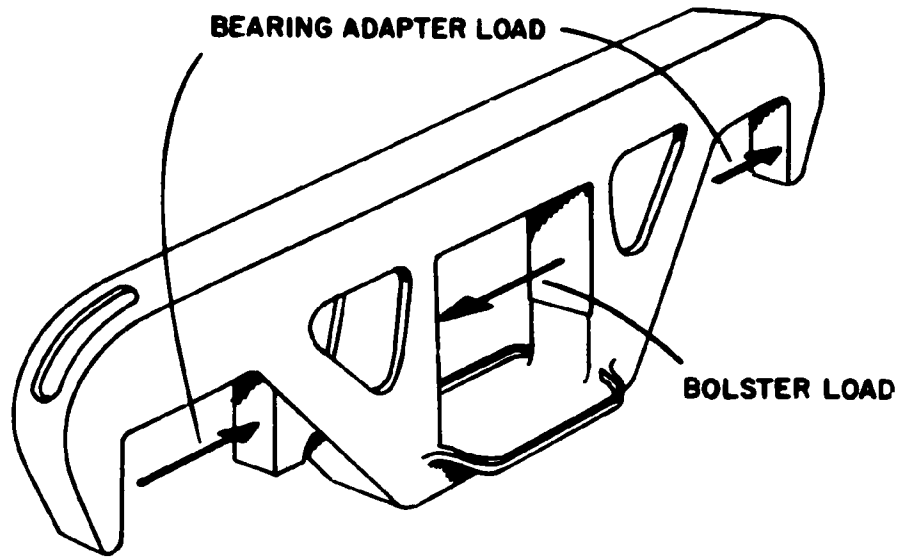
SIDE FRAME LONGITUDINAL LOADS
